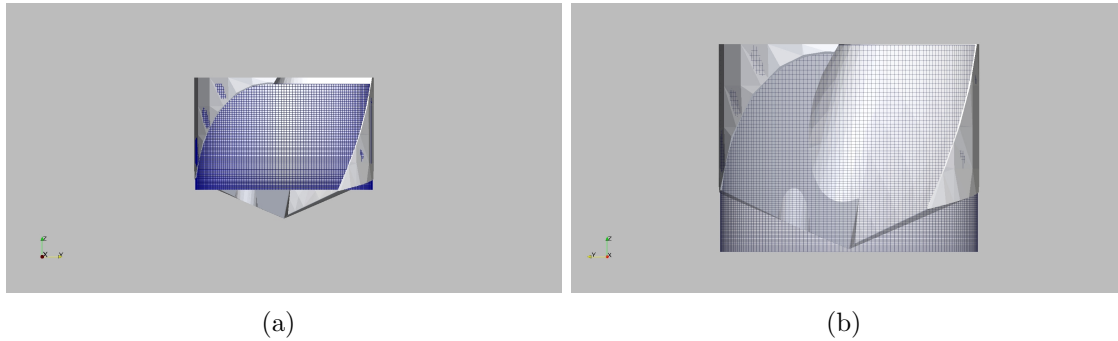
Tool geometry positioned inside two meshes of a cylinder.
